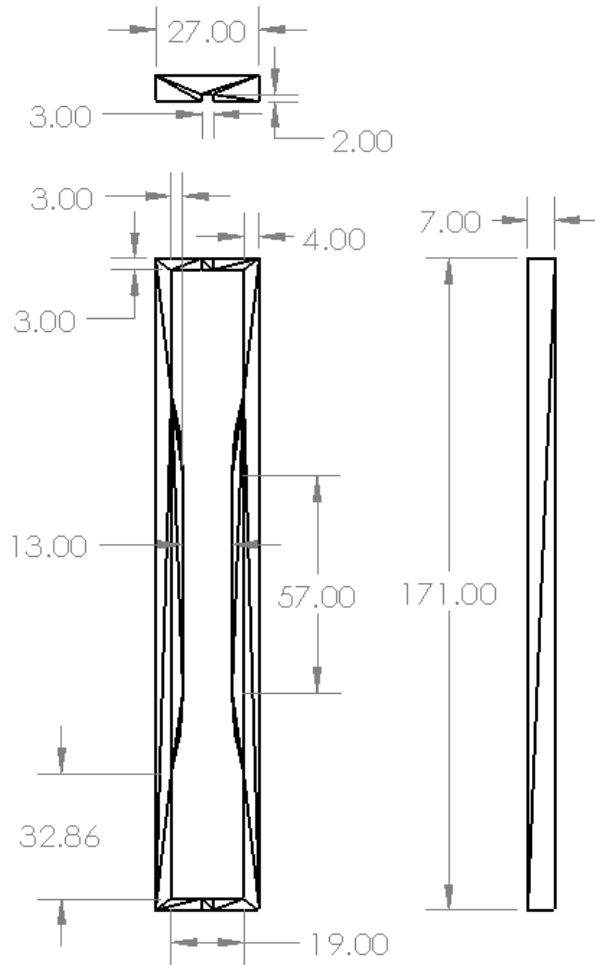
The mold used to manufacture dogbone tensile samples following standard ASTM D638-03.
